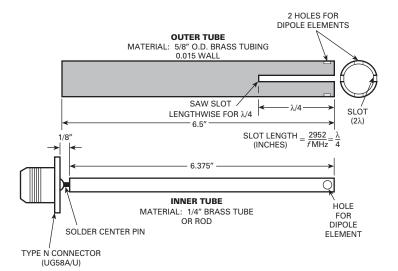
PRE-ASSEMBLY DETAILS of the feedline/balun tubes. For 400 to 475-MHz operation of the corner-reflector antenna the outer tube length should be increased to 14 inches; the inner tube, 13.785 inches.
